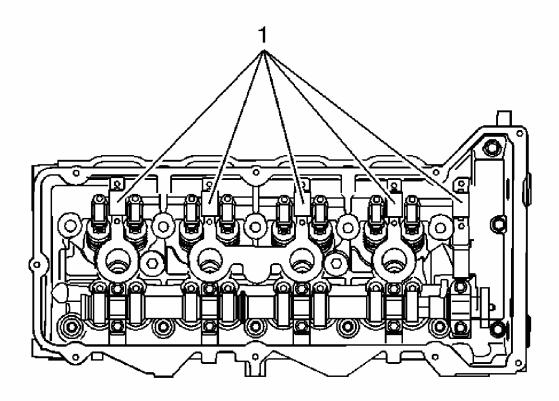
View of Camshaft Journals Courtesy of GENERAL MOTORS CORP.
